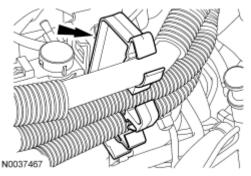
Locating Evaporative Emissions (EVAP) Tube Bundle Retaining Clip Courtesy of FORD MOTOR CO.
